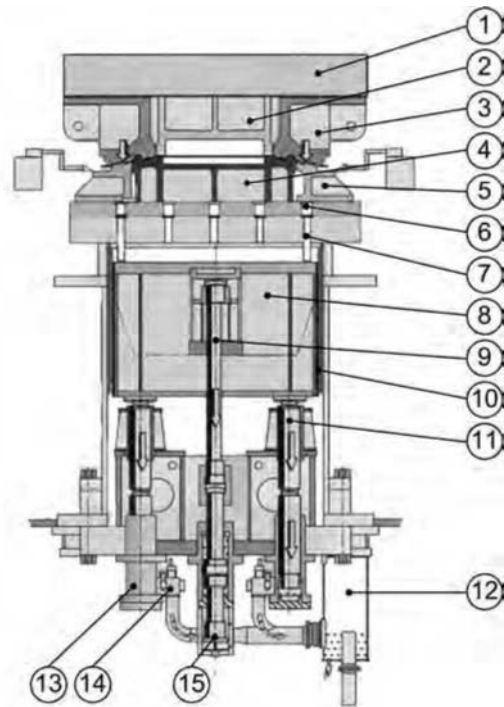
Components of the hydraulic cushion system: 1, ram; 2, ejector; 3, upper die; 4, punch; 5, blank holder; 6, pressure pins in die; 7, pressure pins in drawing cushion; 8, pressure box; 9, lifting piston rod; 10, die cushion guide; 11, displacement piston; 12, overflow tank; 13, displacement cylinder; 14, hydraulic control block; 15, mechanical stroke limitation. Source: Ref 13.2
